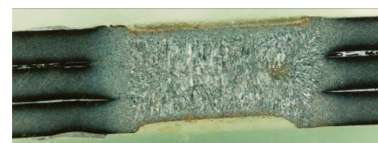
Microstructure of the weld, sample B2, diameter of weld nugget $d = \varnothing 5.5 \text{ mm}$
